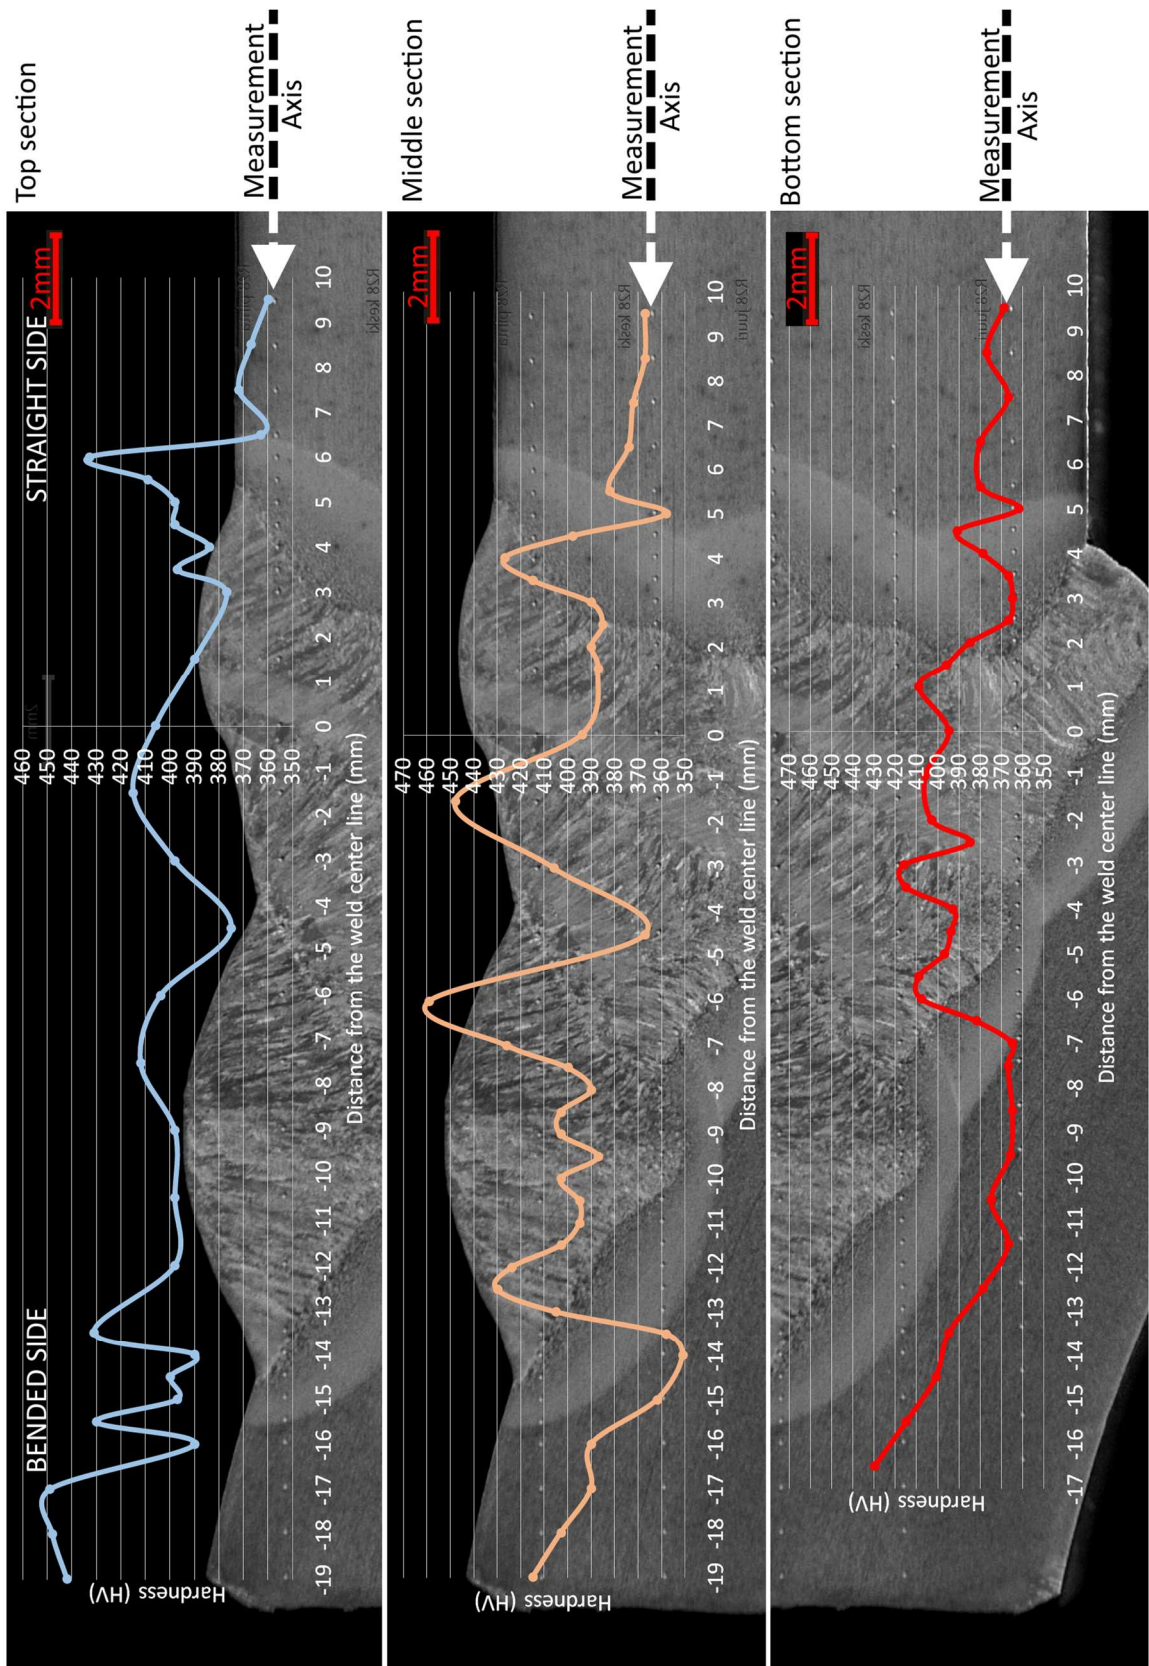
Hardness profiles of S1100 welded sample with $r = 28$ mm and $r/t = 3.50$ on its bended side.
